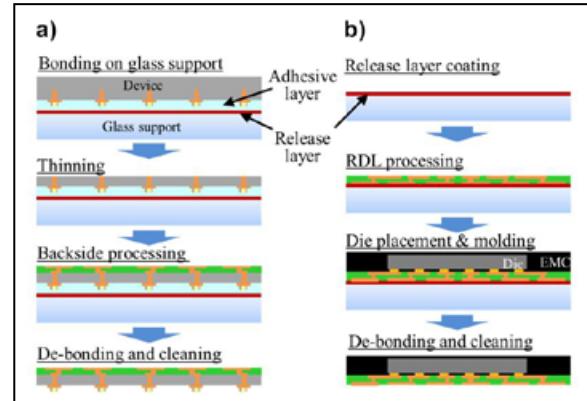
Schematic drawing of the TBDB process: a) Device wafer thinning and backside processing; b) Mold wafer build-up for fan-out packages.
